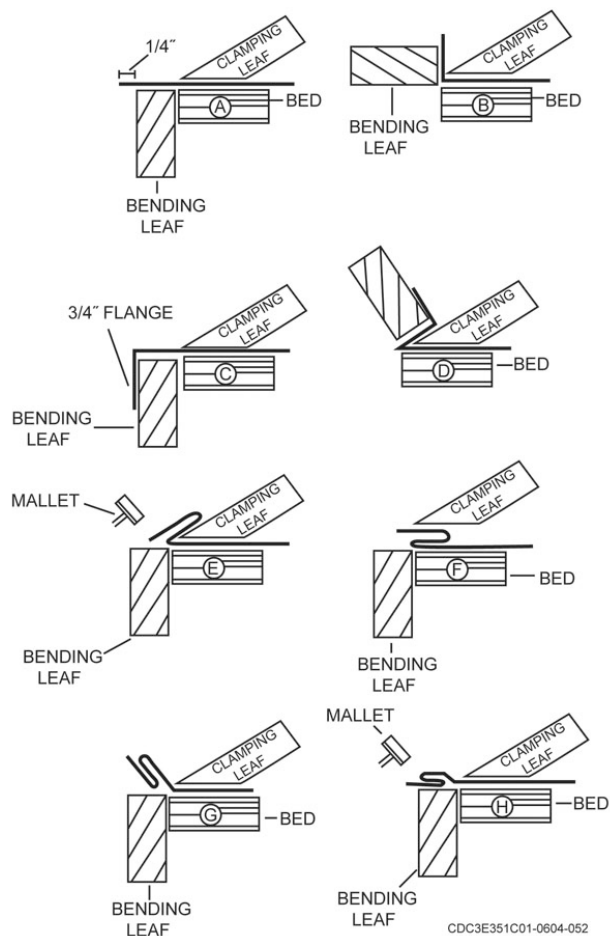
Forming a Pittsburgh pocket with a cornice brake.
